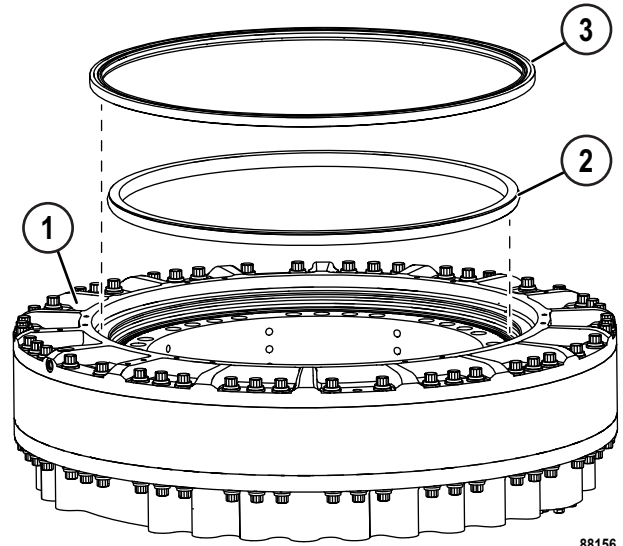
BRAKE SEAL ASSEMBLY REMOVAL
